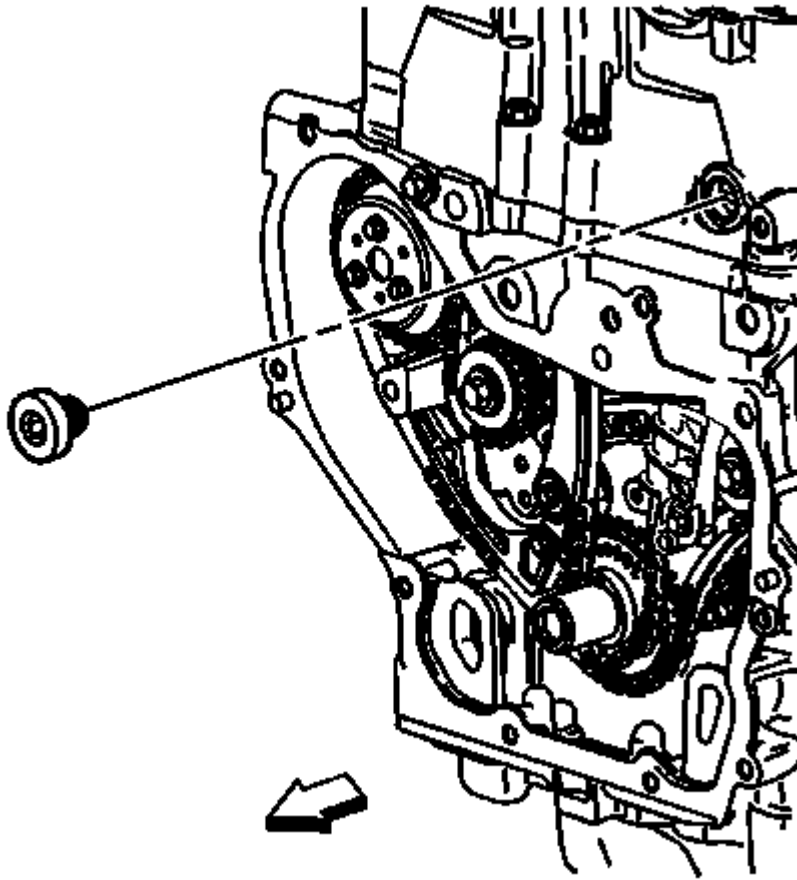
View Of Fixed Timing Chain Guide Access Plug
